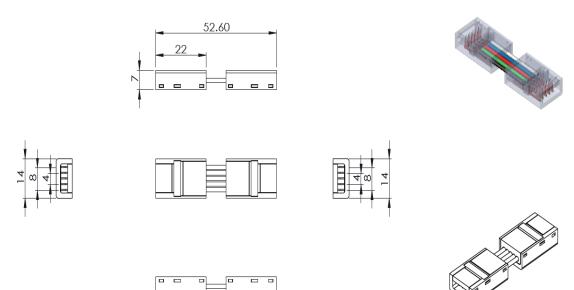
Mechanical Drawing for BXCN-RGBW-L053-DH
